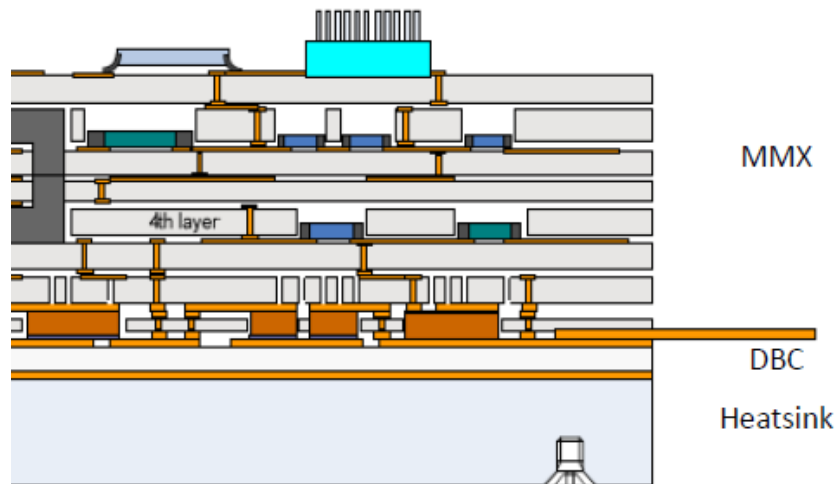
Graphical representation of the cross section of a PCB using the Multi-Mix technology [6].
